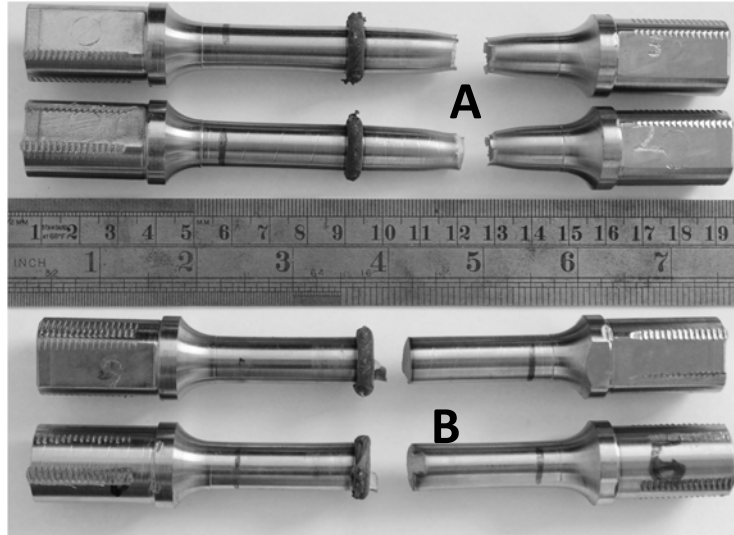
Tensile test specimens A) Failed away from weld zone and B) failed on the weld zone
